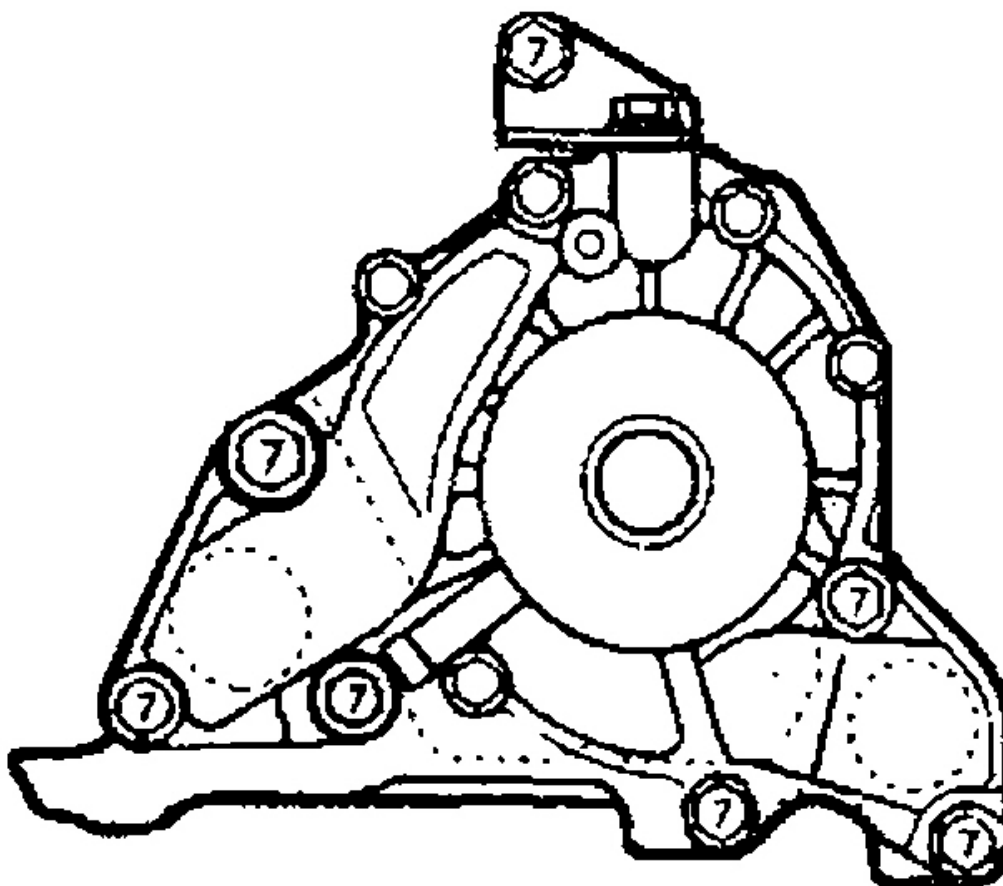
Identifying Coolant Inlet Pipe-To-Pump
